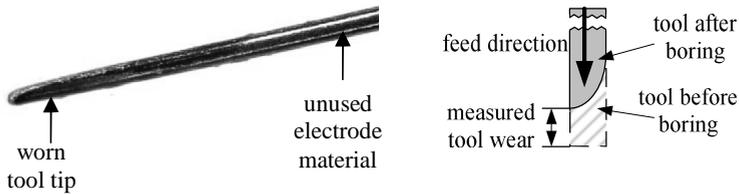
tungsten carbide electrode tool  $\varnothing$  80  $\mu$ m with frontal and side wear Figure 2 – schematic of the tool wear
